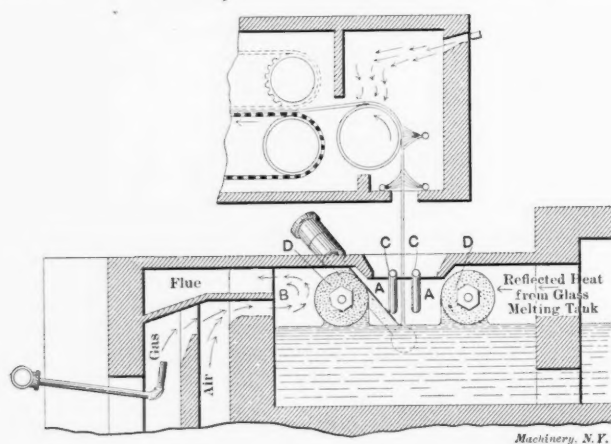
Cross-section of Perfected Continuous Sheet Machine.
